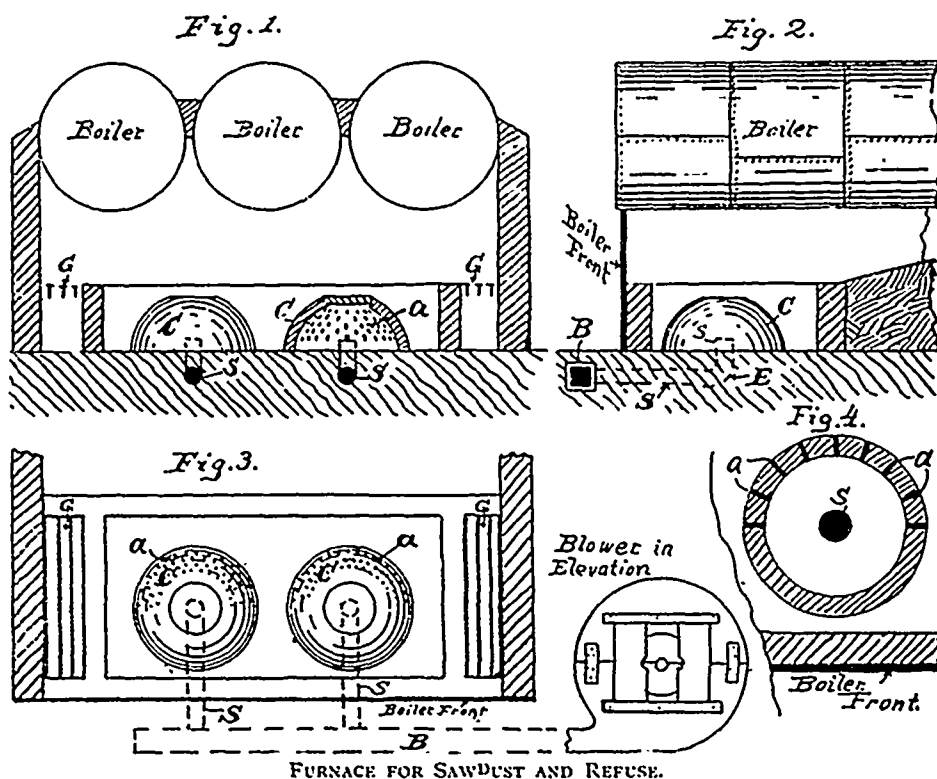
, Front Elevation, boiler front removed, one cone in section. Fig. 2, Side Elevation, side of furnace removed. Fig. 3, Top Plan, boilers removed. Fig. 4, Sectional Plan of Cone. C, Cones. B, Box. E, Elbow. S, Stove Pipe. G, Grates. A, Blast Openings.
